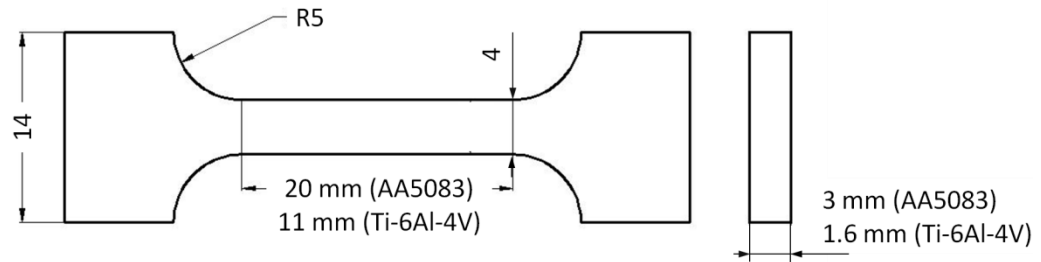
Dog-bone shaped tensile specimen (unit: mm).
